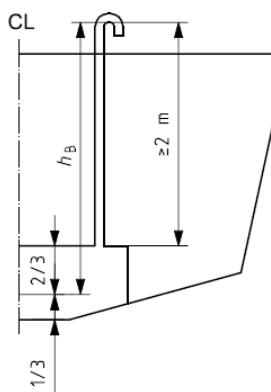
Measurement of dimensions for integral tank scantling calculation
